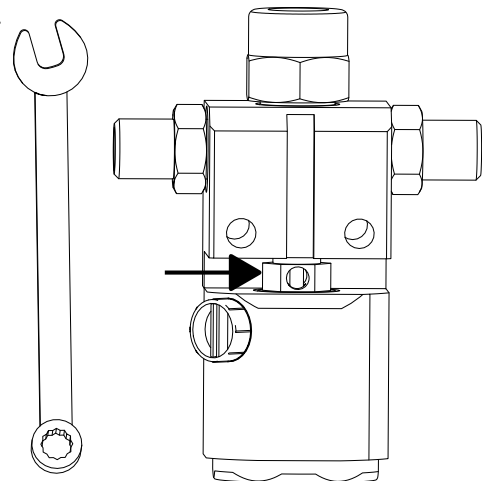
Tightening the packing screw with the WAF 13 open end spanner
